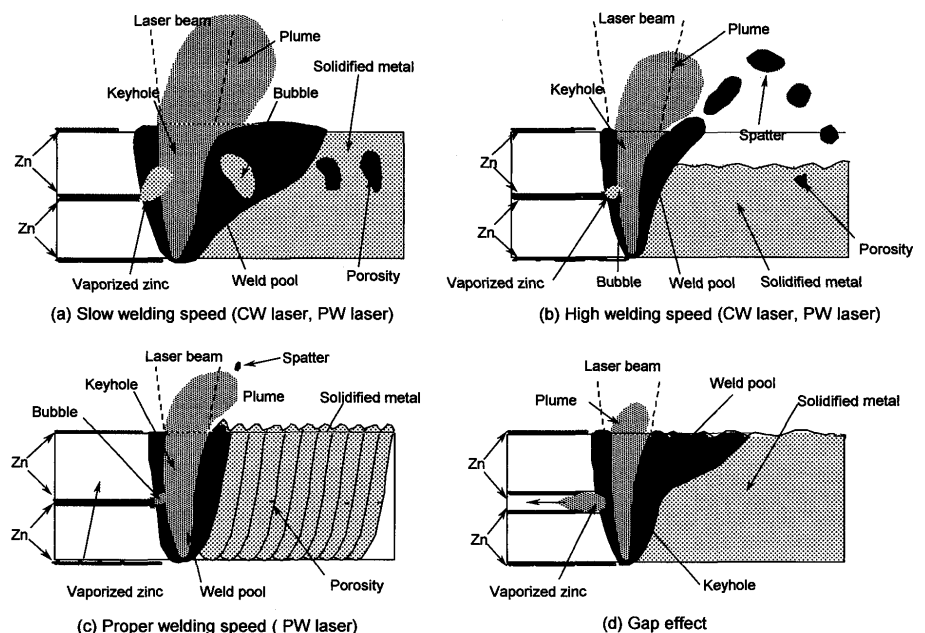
Schematic representation of cw or pw YAG laser lap welding behavior of Zn-coated steels.
